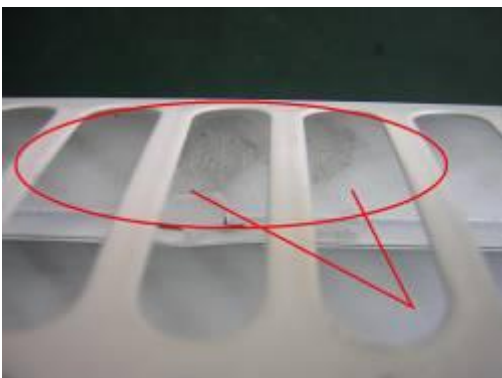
Poor painting on rear inner buckle position. (can be seen clearly form outer produce)-2
